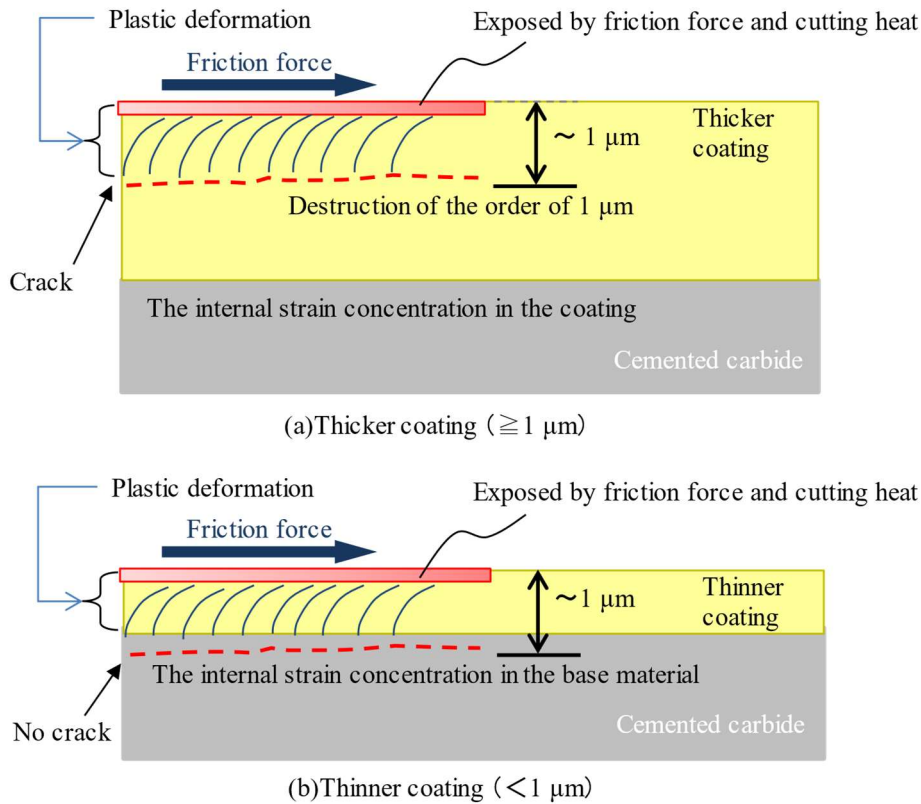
Model for damage of the coating at the flank face of the cutting edge during machining of Ni-based superalloys.
